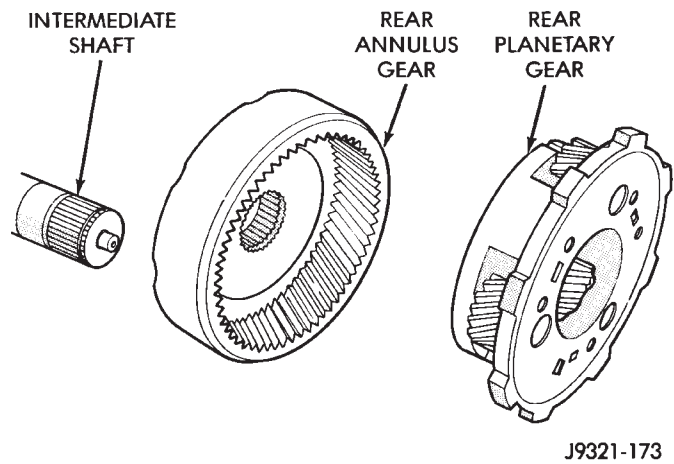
Rear Planetary And Annulus Gear Removal (46RH)
